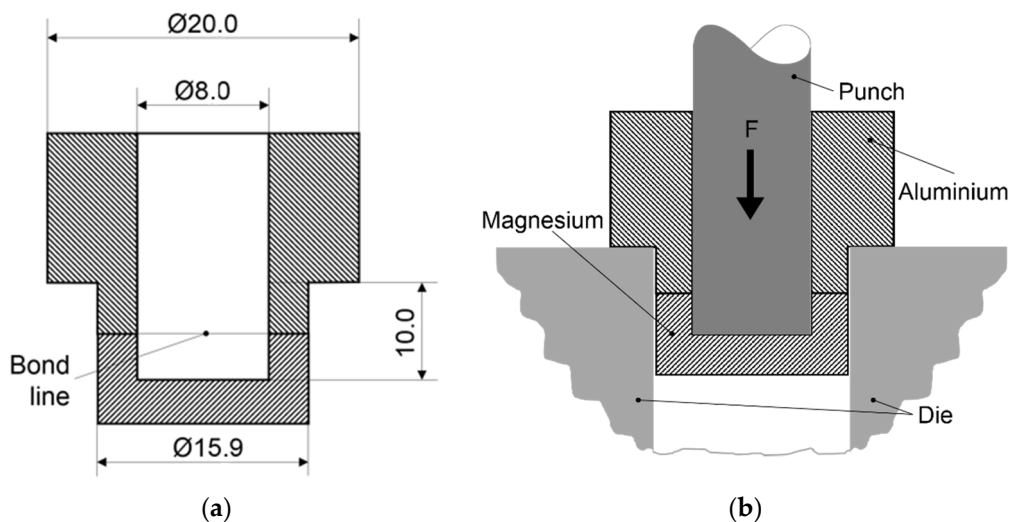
Tensile testing of diffusion bonded joints (a) characteristic geometrical dimensions of a top hat sample and (b) schematic testing setup.
